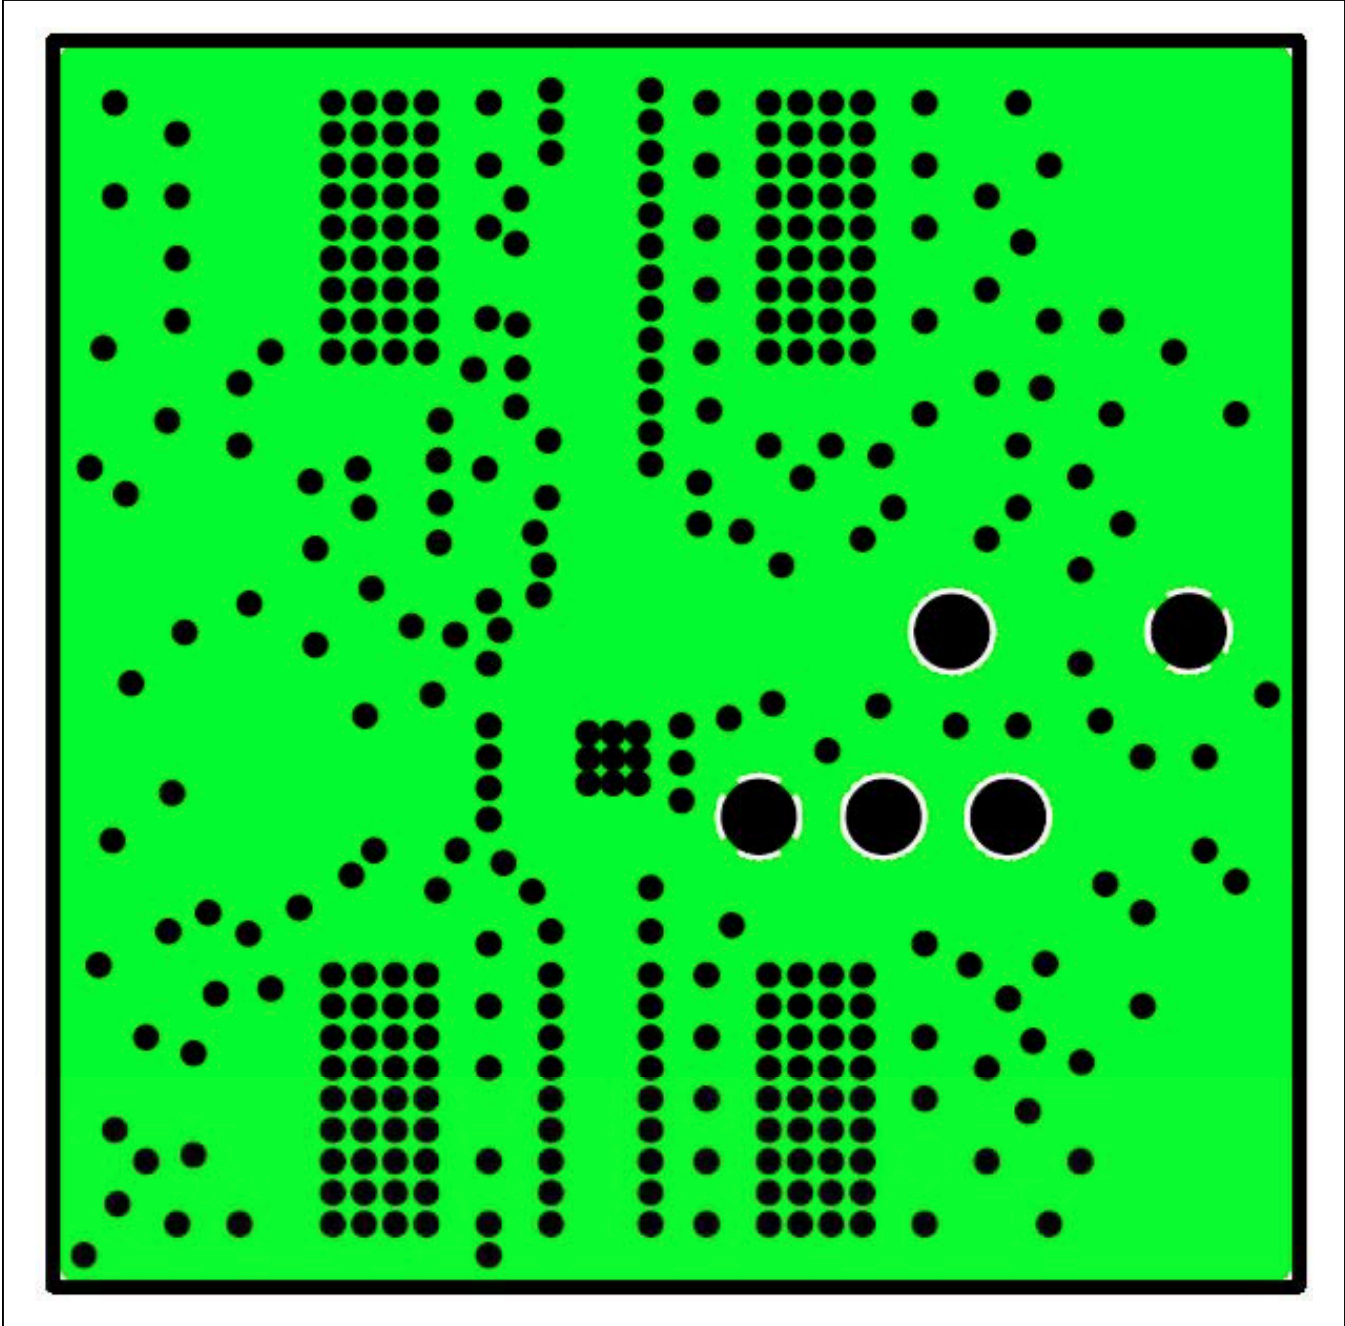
MAX2612–MAX2616 EV Kit PCB Layout—Layer 3
